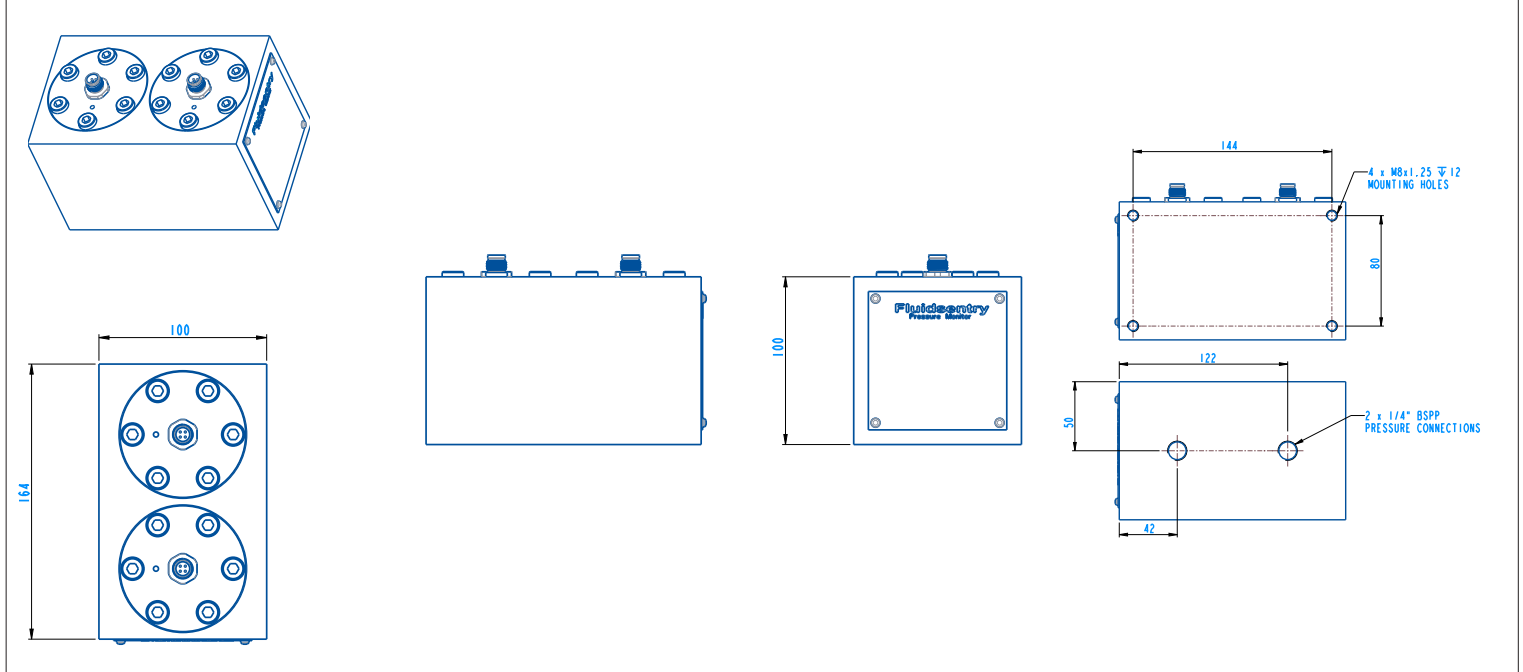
Dimensional Drawing - Dual Zero Pressure Monitor - ZPM-2-SG025-0D0-MP0
